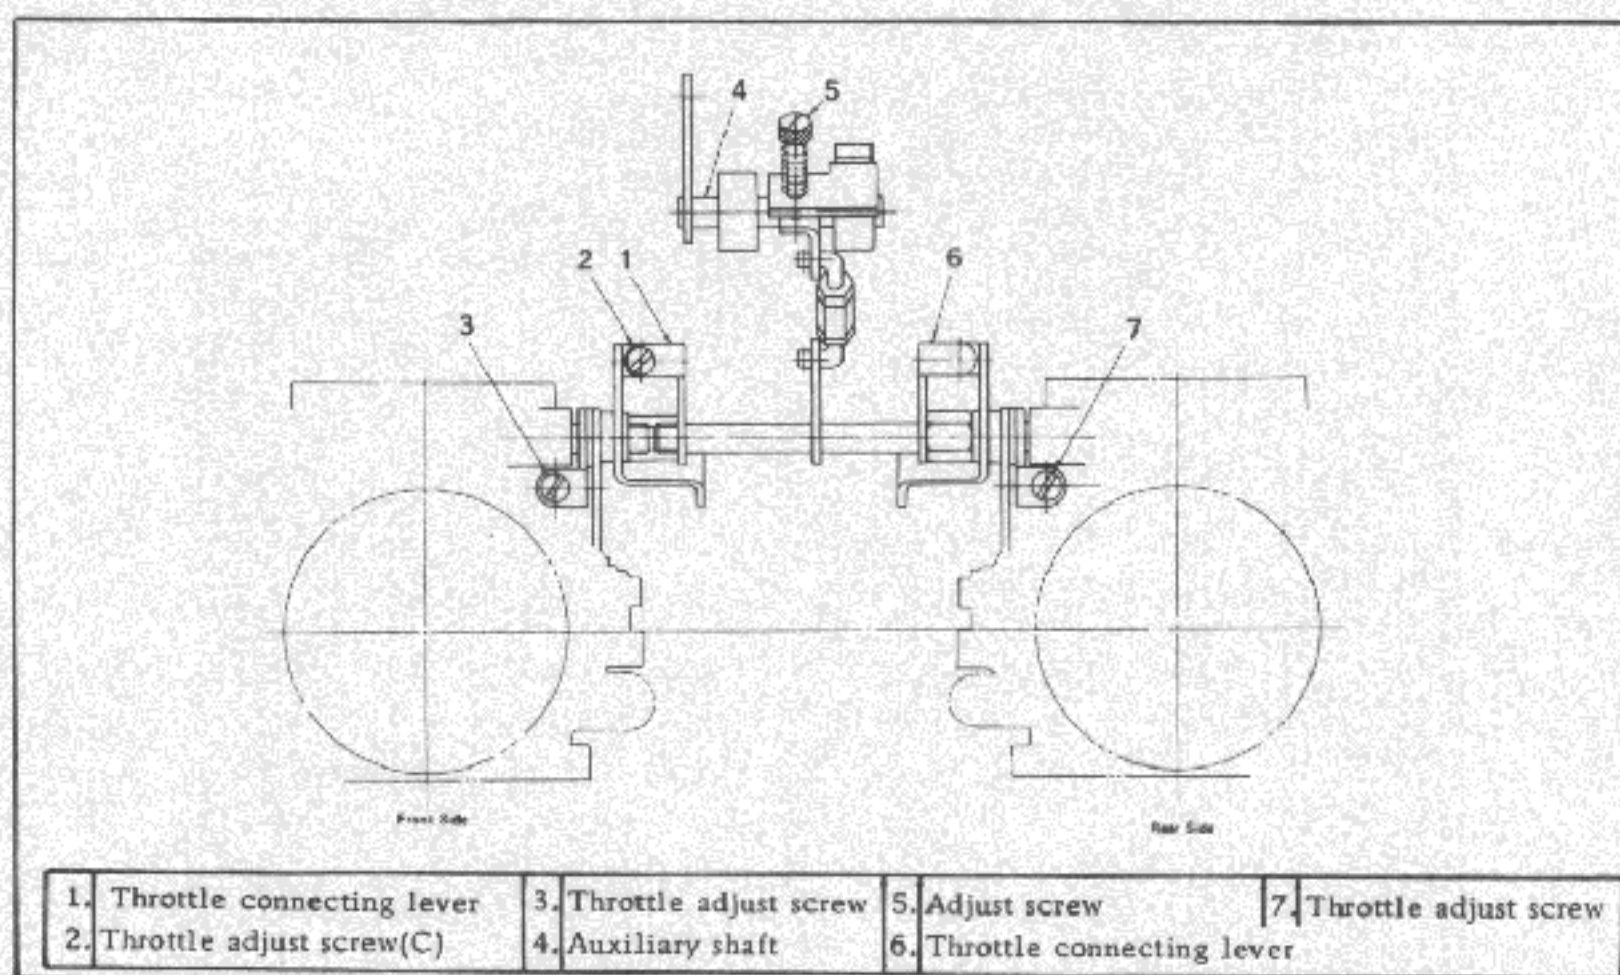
Throttle valve shaft interlock and throttle valve full closing adjustment
